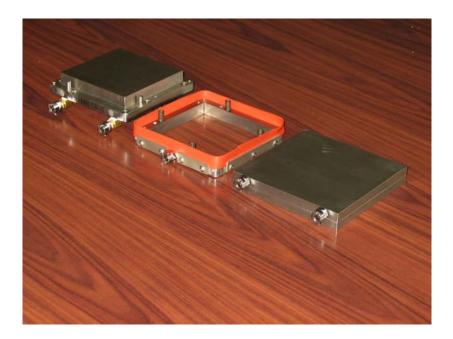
Photograph of Stainless Steel Mold for 1 mm Thick Films
